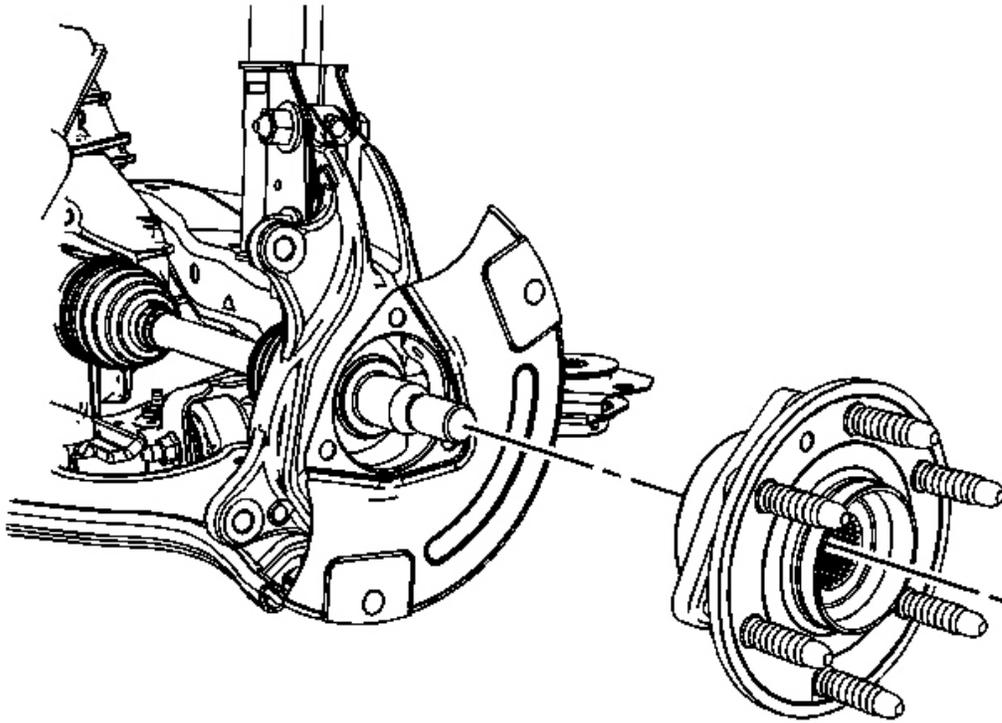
Identifying Wheel Bearing & Hub Assembly
